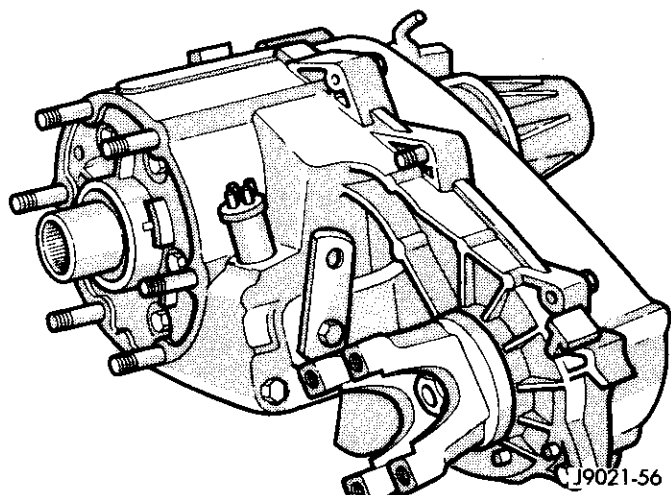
Model 231 Transfer Case (YJ Version Shown)
